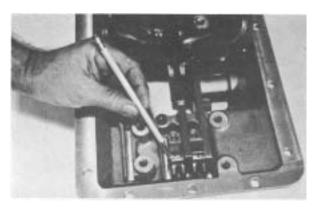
Install 2nd interlock tapered pin. Align pin with interlock cross pin hole.
